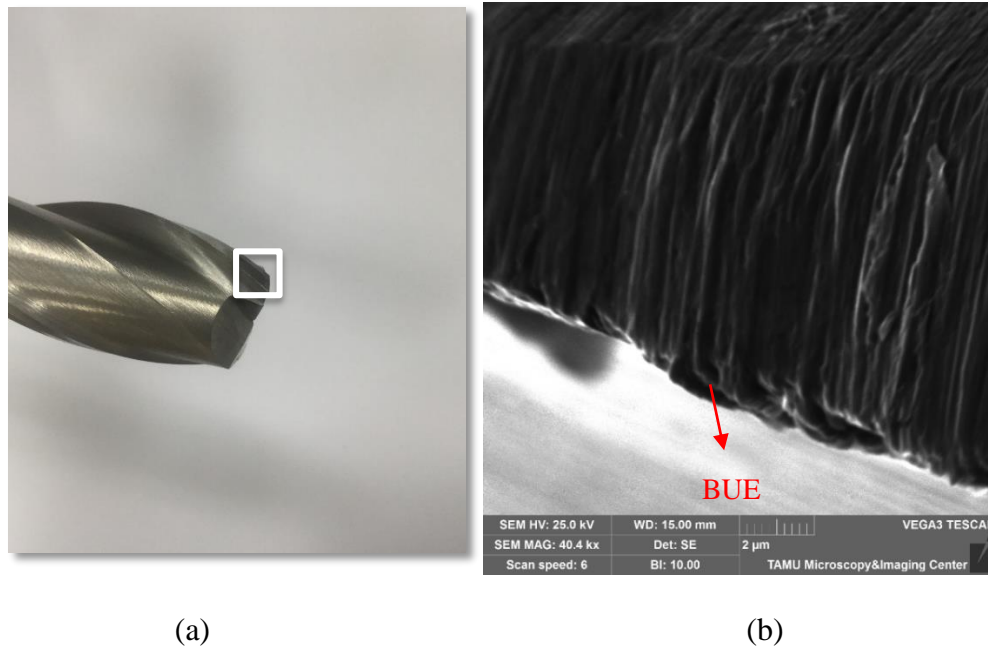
(a) Flat end mill with arrows pointing towards view area of micro end mill tool. (b) Scanning electron microscopy image of cutting edge. Uncoated WC tool with BUE, $\Phi 0.406$ mm, 10 m/min speed, 0.05 $\mu\text{m}/\text{tooth}$ chip load, 30 μm depth, 24 mm milling length, MQL.
